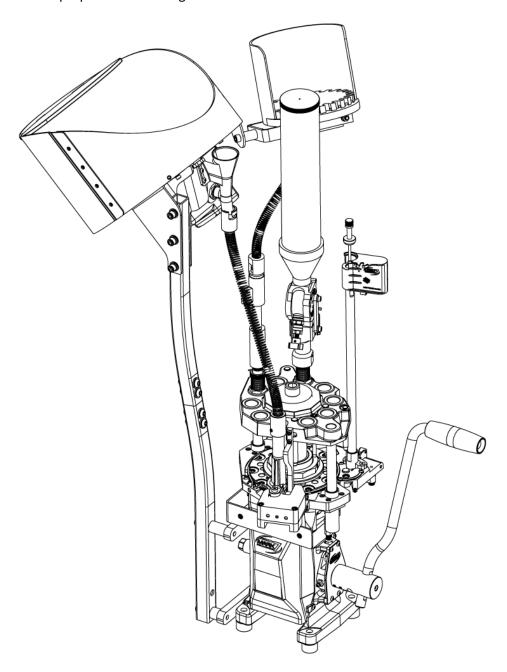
APEX 10 with Mr.Bulletfeeder installed
